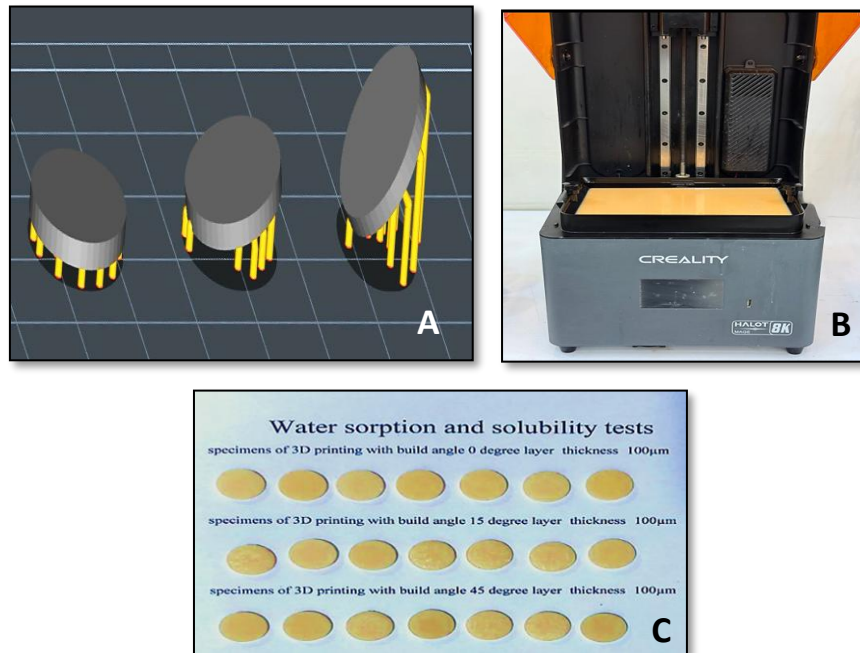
A) Samples for 3D-printed restoration resin were digitally designed at different build orientations (0°, 15°, and 45°) with the corresponding printing support structures. B) Digital printer. C) Printed samples
